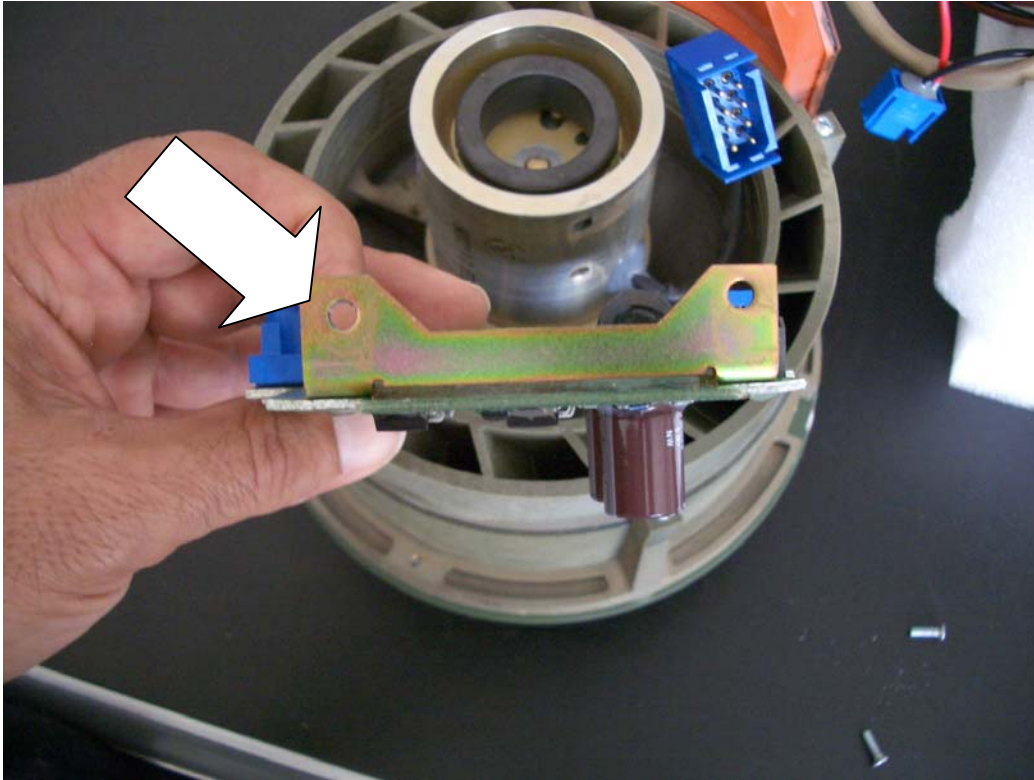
Detail, Circuit Board Brackets Requiring Heat-Sink Compound
